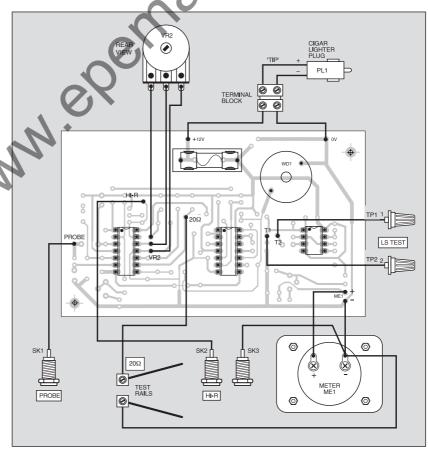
Interwiring from the printed circuit board to off-board components. The general layout within the case can be seen in the photographs.
